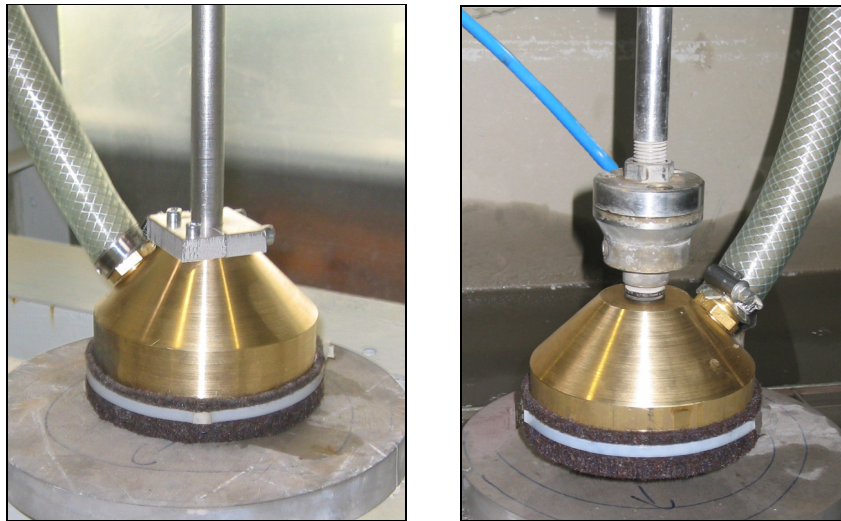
Shielded cutting heads (left: AWSJ; right: AWIJ)
